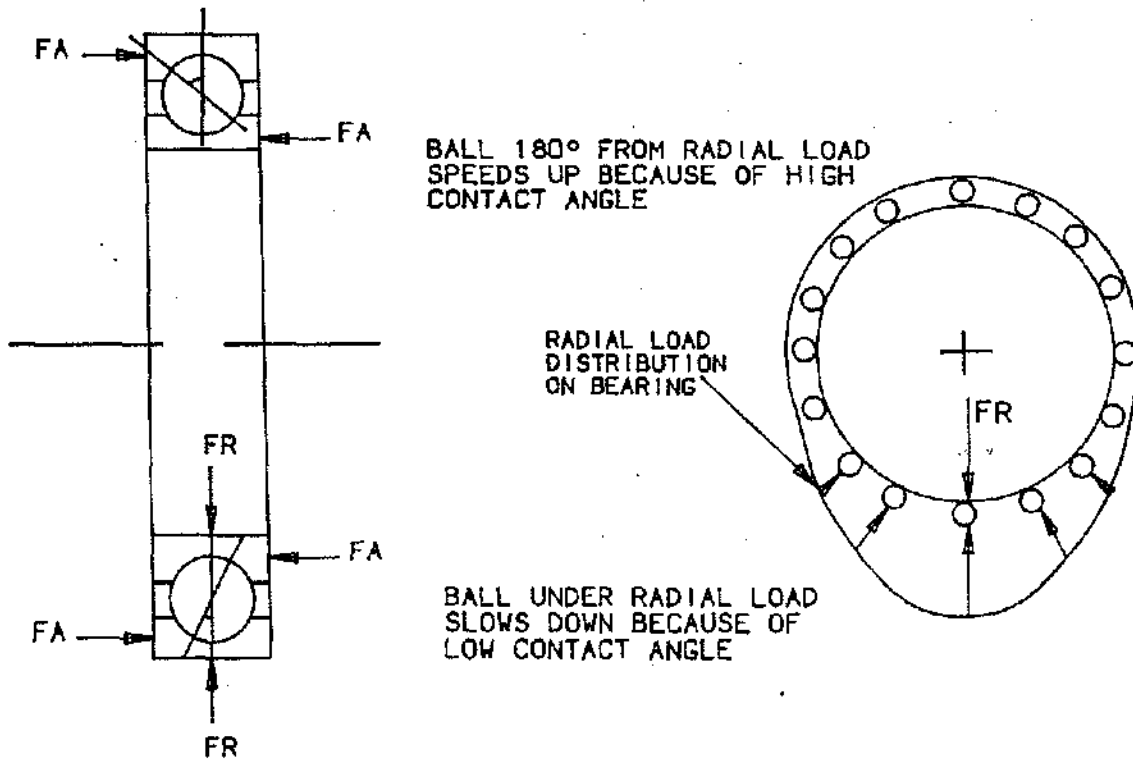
Ball Bearing With Combined Radial & Thrust Loads
